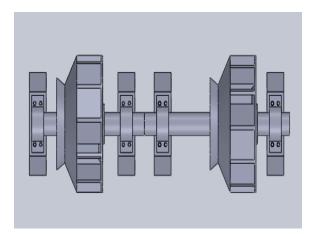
, Lift and thruster impeller assembly on stand (top view)
